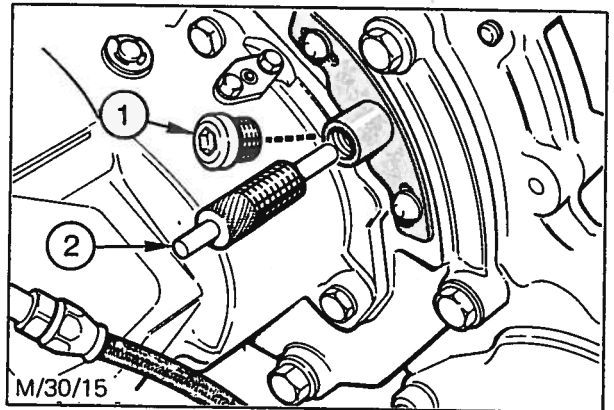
Injection Pump Timing - Automotive and G.P. Governed Pumps
